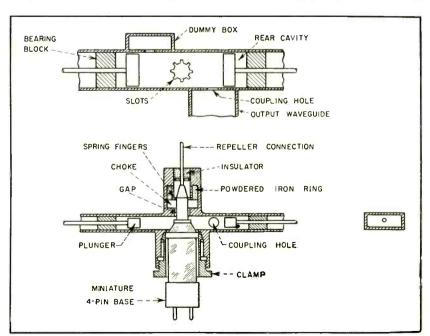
Top, front and side sectional views of tunable waveguide oscillator
